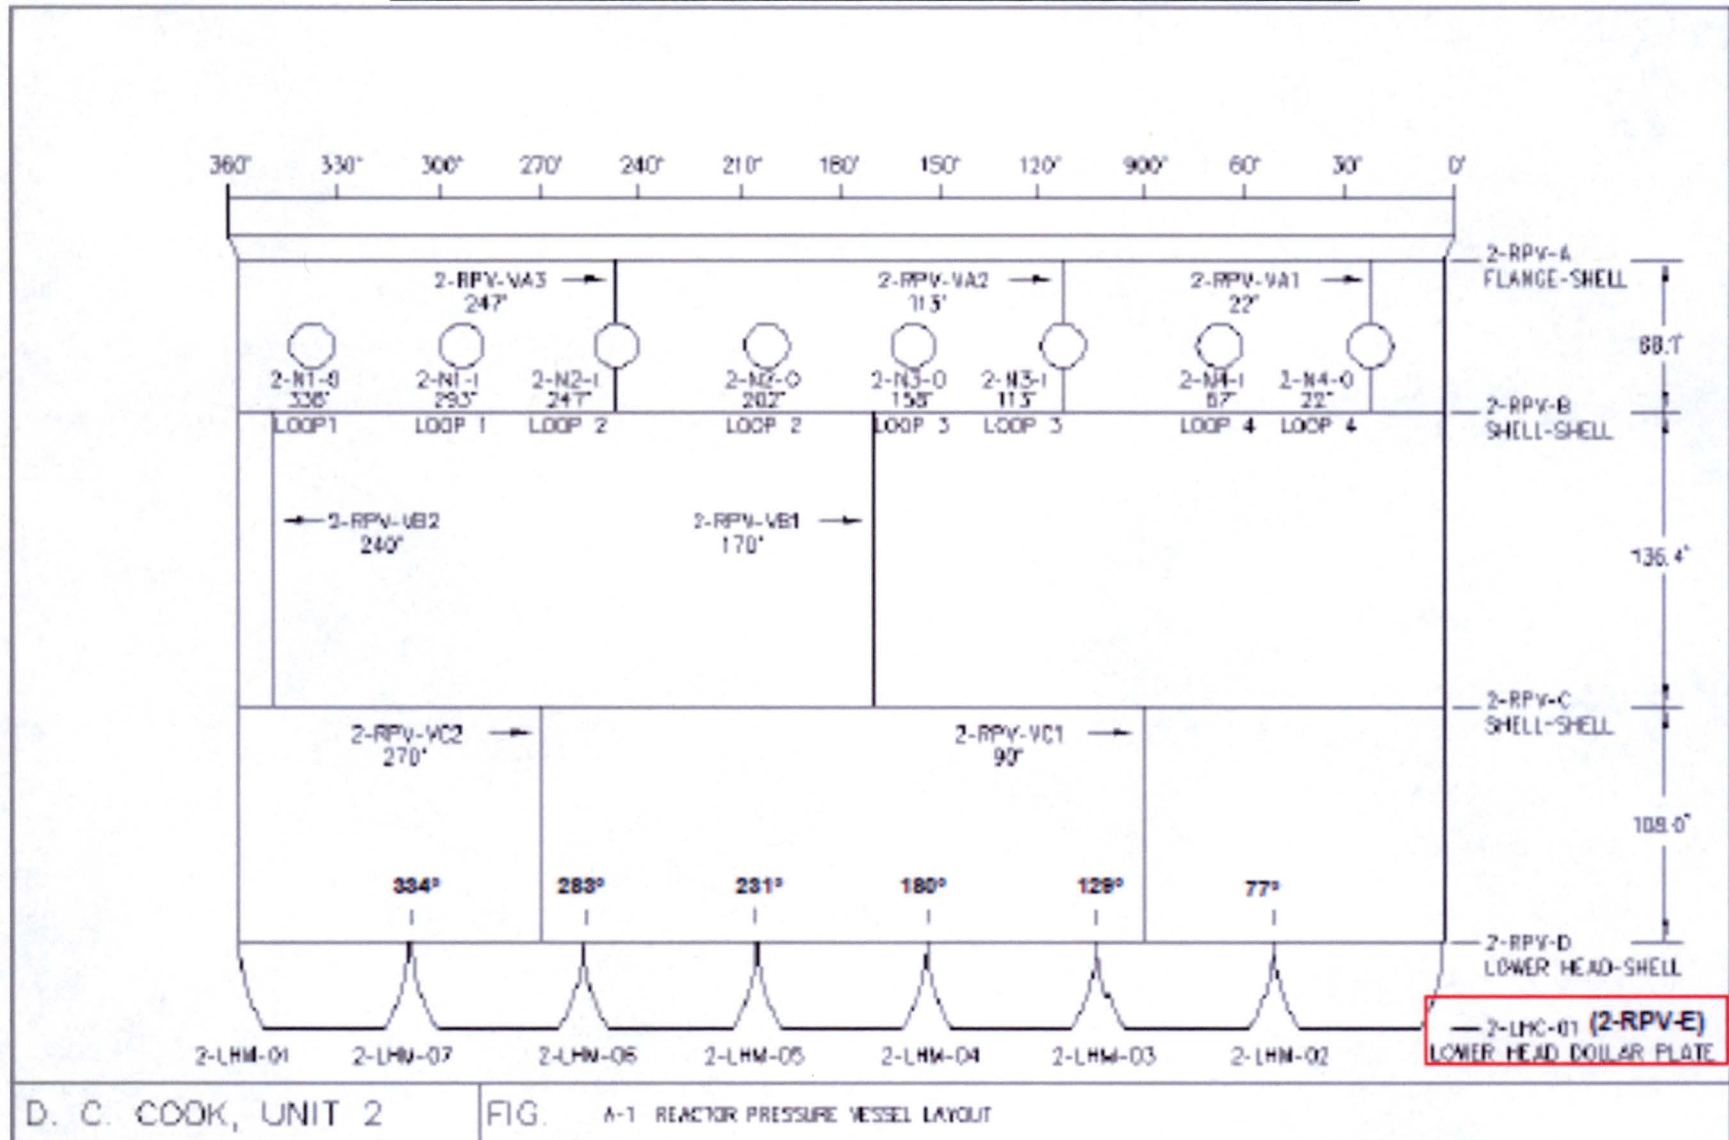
Weld 2-RPV-E (2-LHC-01) (Extracted from Reference DRAWING 2A-1)
